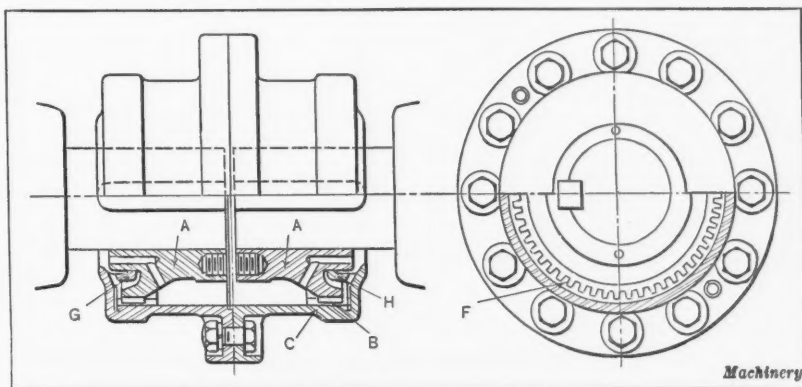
Shaft Coupling provided with External and Internal Gear Teeth
